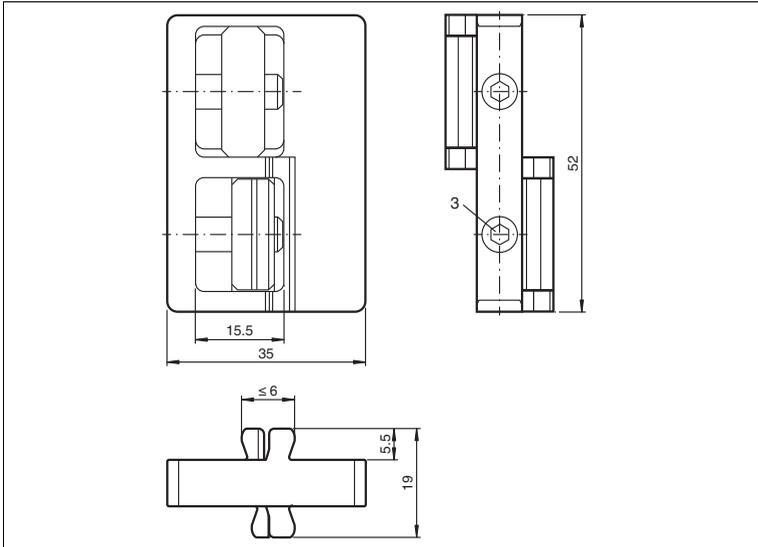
Dimensional drawing of mounting aid OMH-SLCT-10
